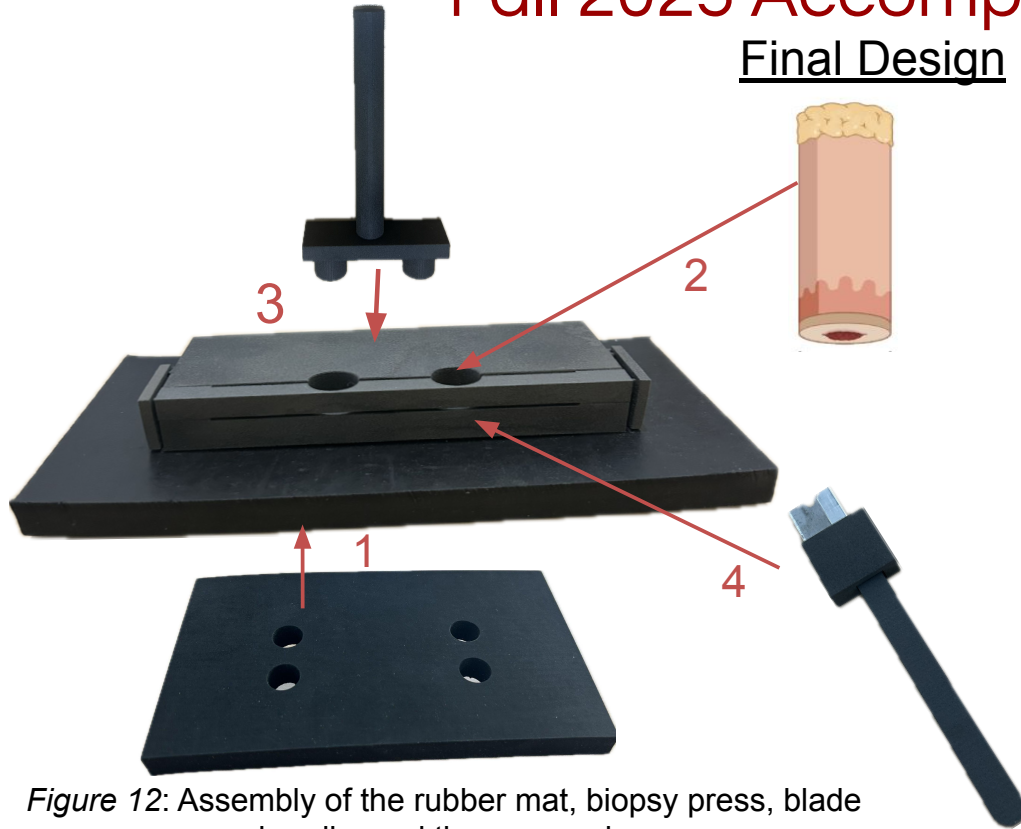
Assembly of the rubber mat, biopsy press, blade handle, and tissue sample
